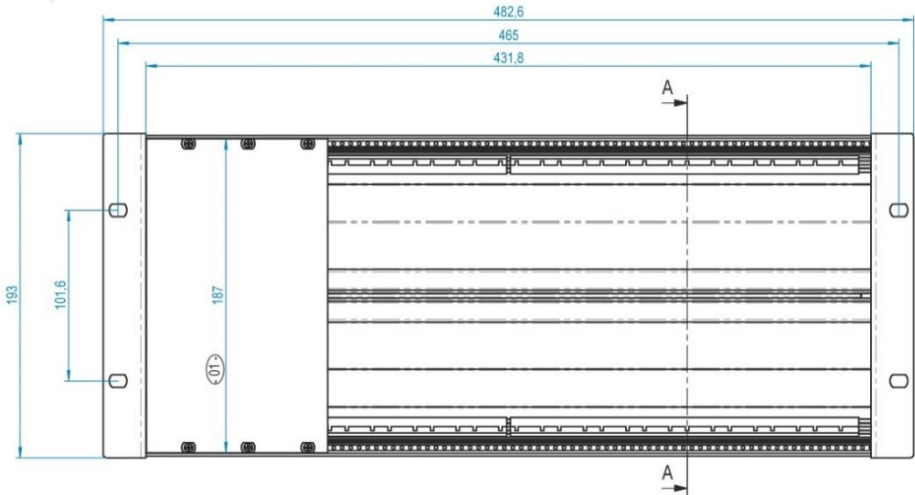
Mounting dimensions BCU-50-L 19" plug-in unit
